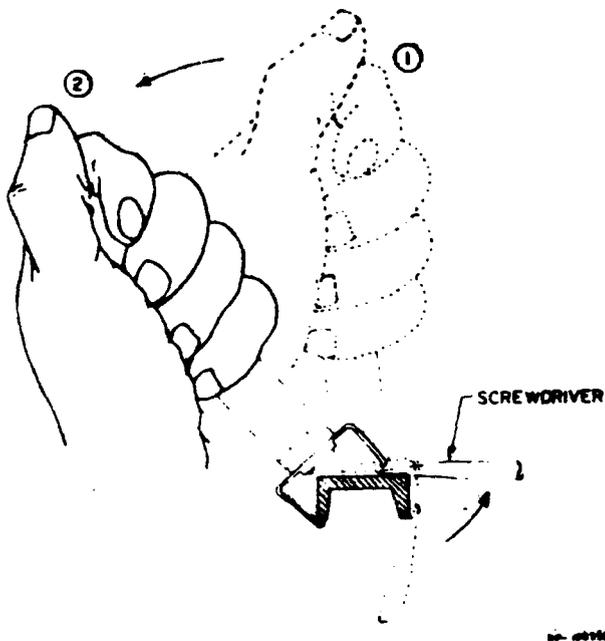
REMOVING CABLE RETAINING BRACKETS USING SCREWDRIVER (PAR. 6.11)
